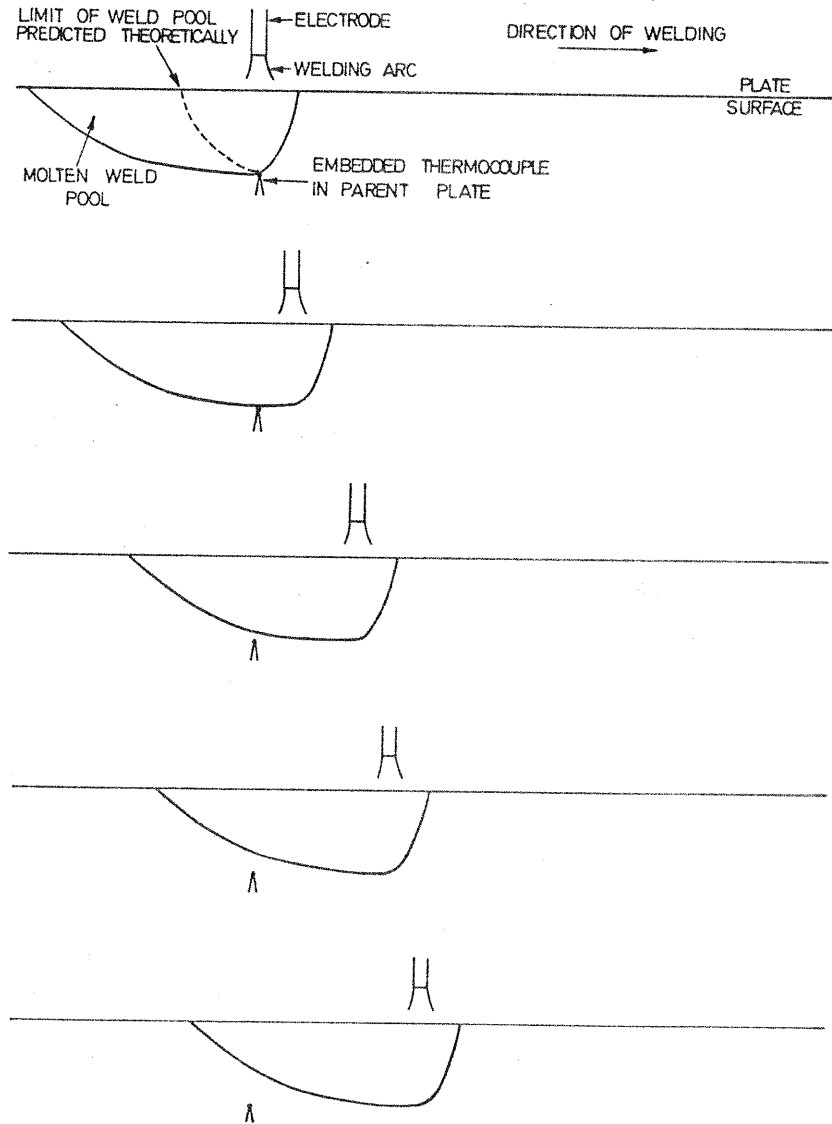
MOVEMENT OF MOLTEN WELDPOOL OVER EMBEDDED THERMOCOUPLE.
